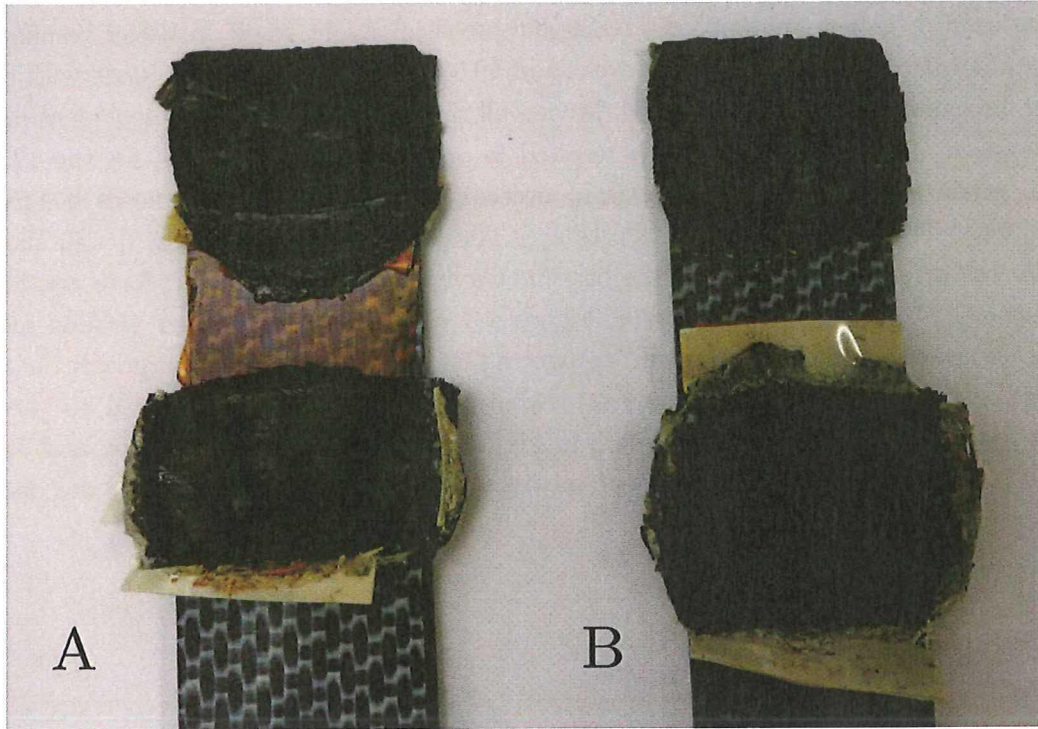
| Fracture surfaces of the samples poorly welded with 300 [N] for A) 19.05 [mm] overlap (#29 appendix B) and B) 25.4 [mm] overlap (#41 appendix B)
